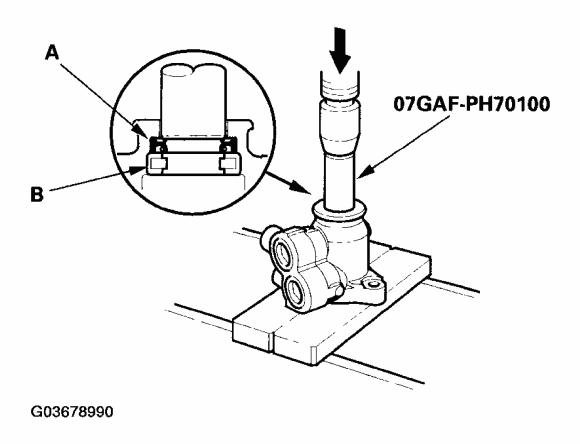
Pressing Valve Oil Seal And Roller Bearing Using Hydraulic Press And Special Tool
